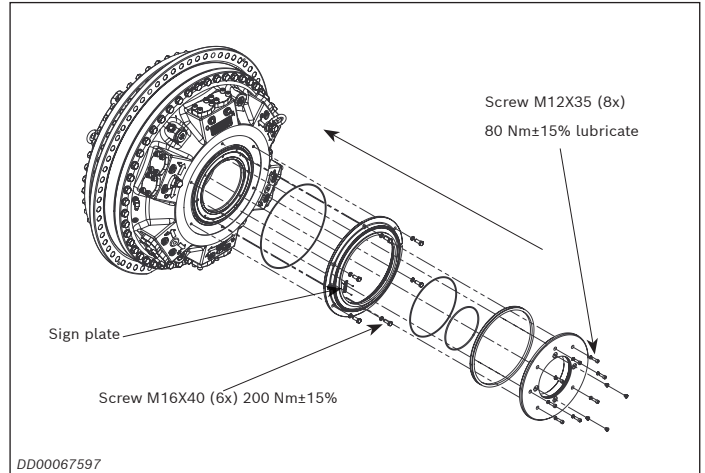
Outer ring, sign plate and SPDC magnetized bearing holder
